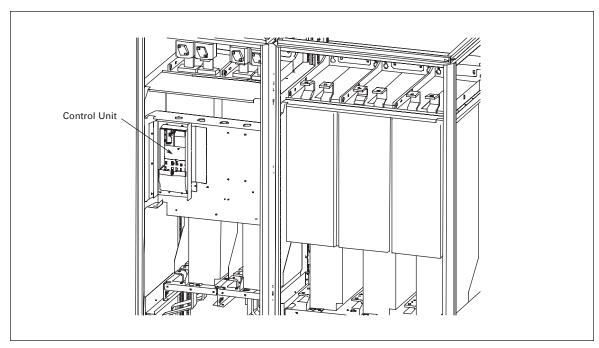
FR13/FR14 Control Unit Mounted on a Hinged Assembly Box (Optional)
